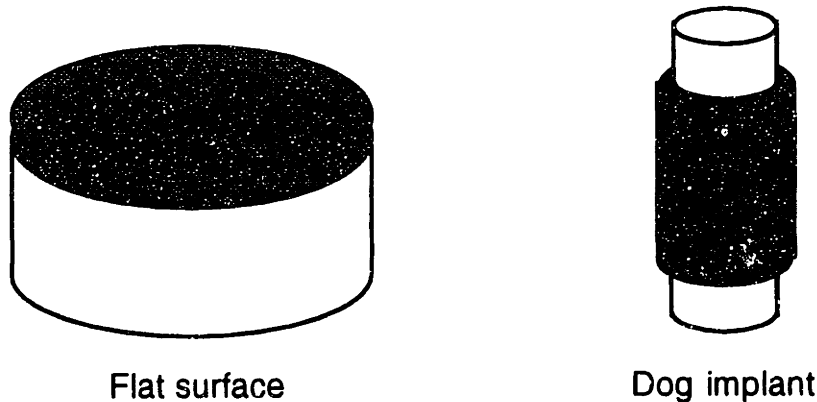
Casting designs for the pull test part and dog implant with texture location showed on shaded area.
